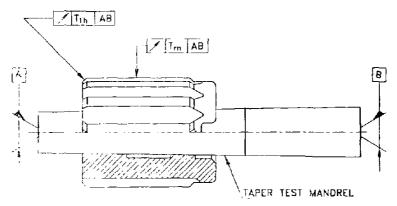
RUN OUT TOLERANCES FOR SHELL REAMERS
